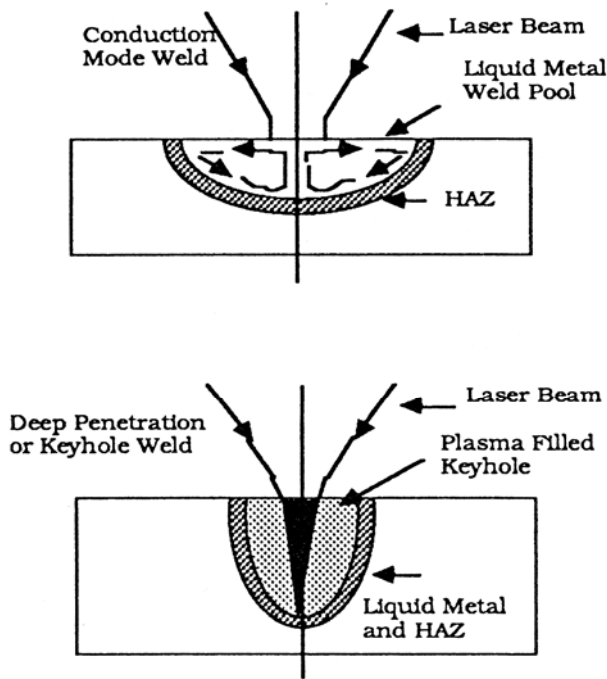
Conduction limited and "keyhole" type welds.
